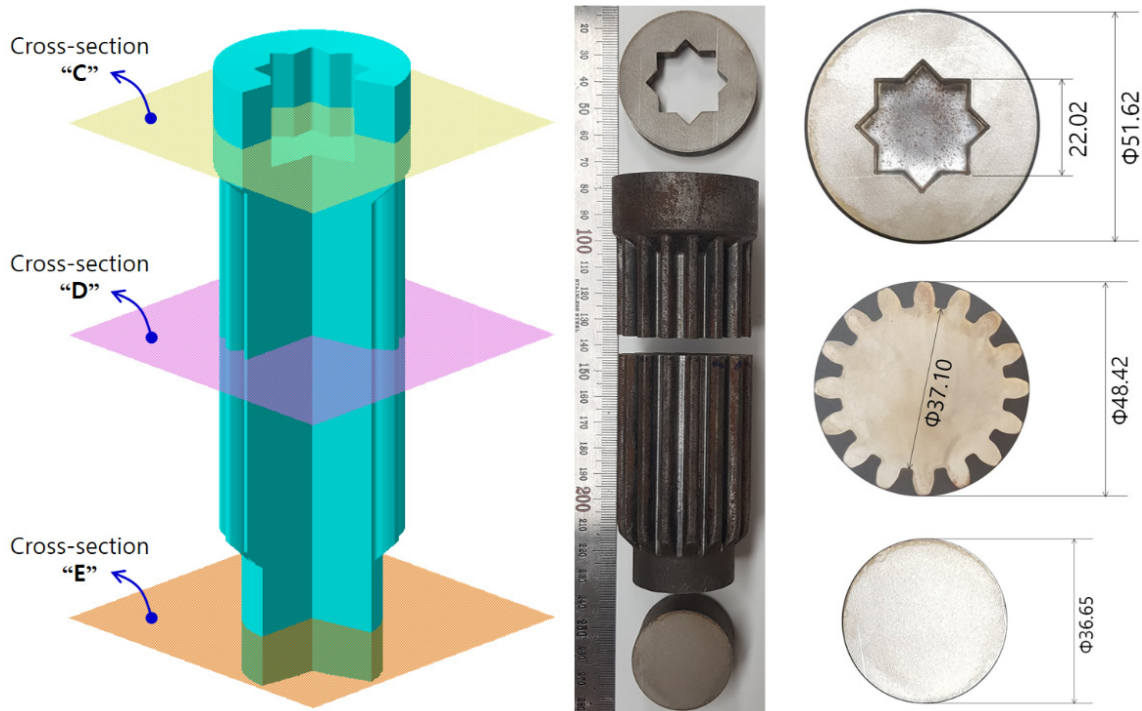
Cross-sectional dimensions of drive shaft fabricated through combined cold extrusion (unit : mm).
